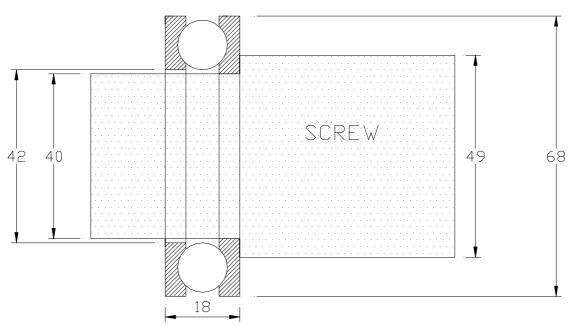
schematic drawing of the position of the screw in the axial bearing (in present design)
